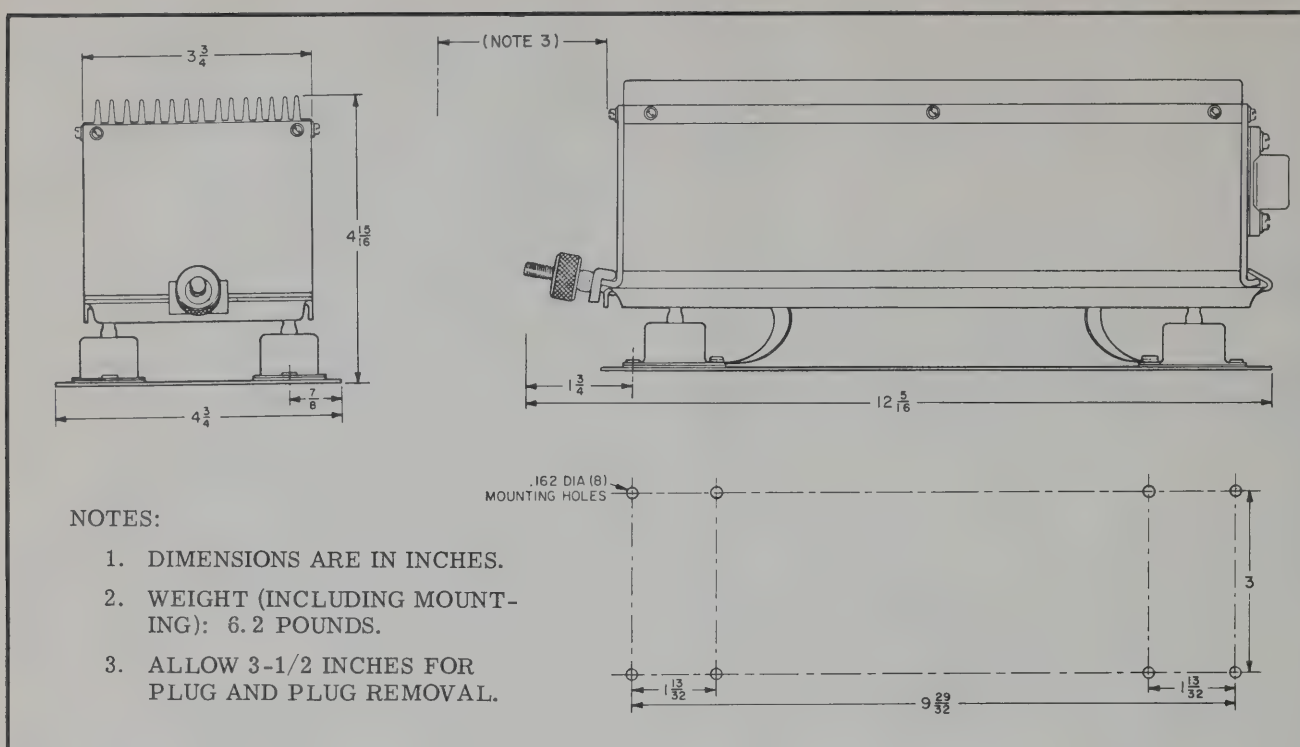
RTA-831A Accessory Unit with Mounting 36320, Installation Dimensions
